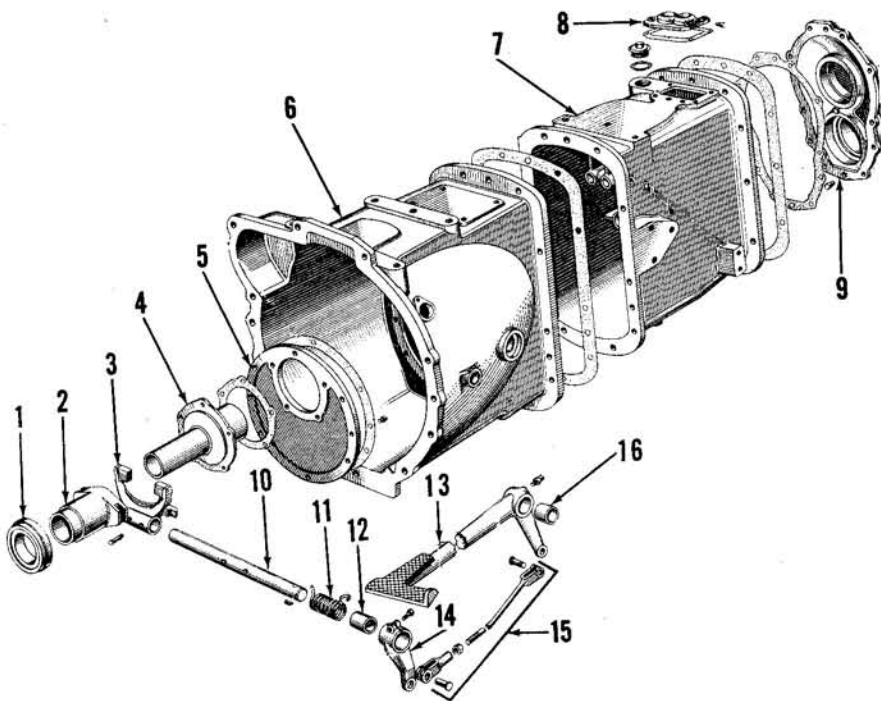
A—Exploded view of transmission housing and clutch release mechanism.
